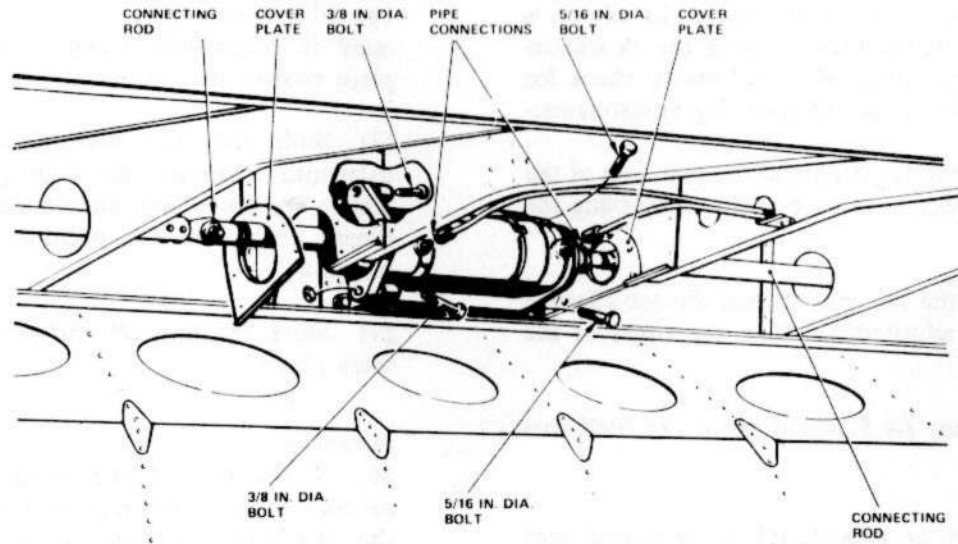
FLAP JACK - REMOVAL AND ASSEMBLY
